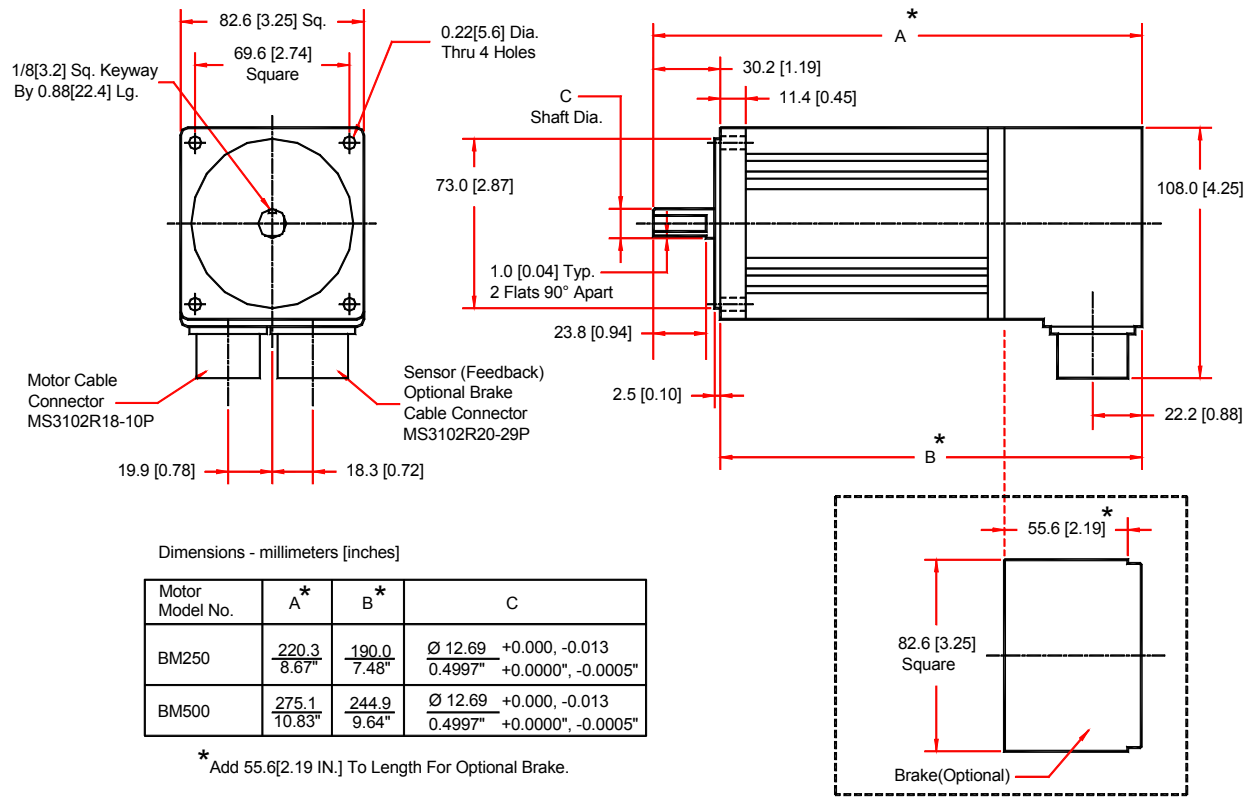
BM250, BM500 Model Dimensions (NEMA 34)
